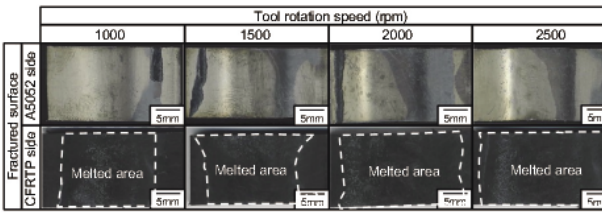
Fractured surfaces on A5052 and CFRTP sides of fractured FLJ joints after tensile shear test.
